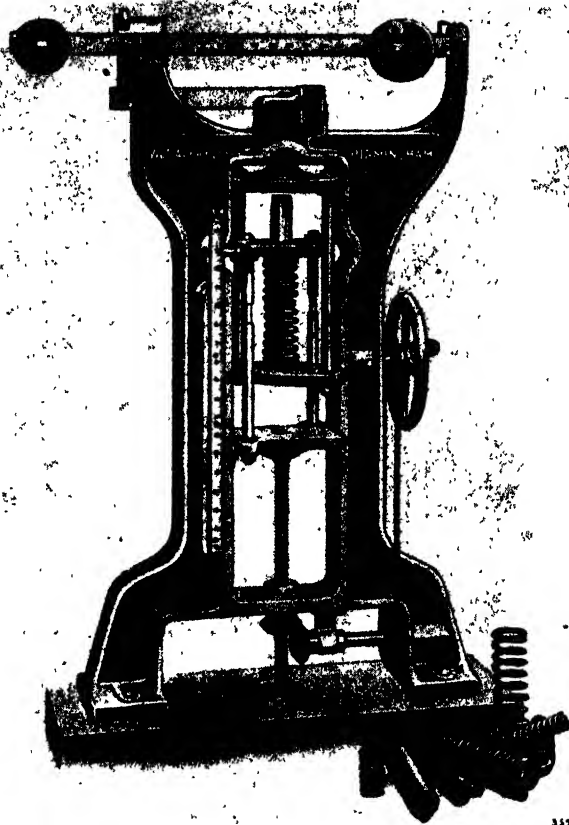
THE AVERY TENSION AND COMPRESSION HELICAL SPRING TESTING MACHINE
